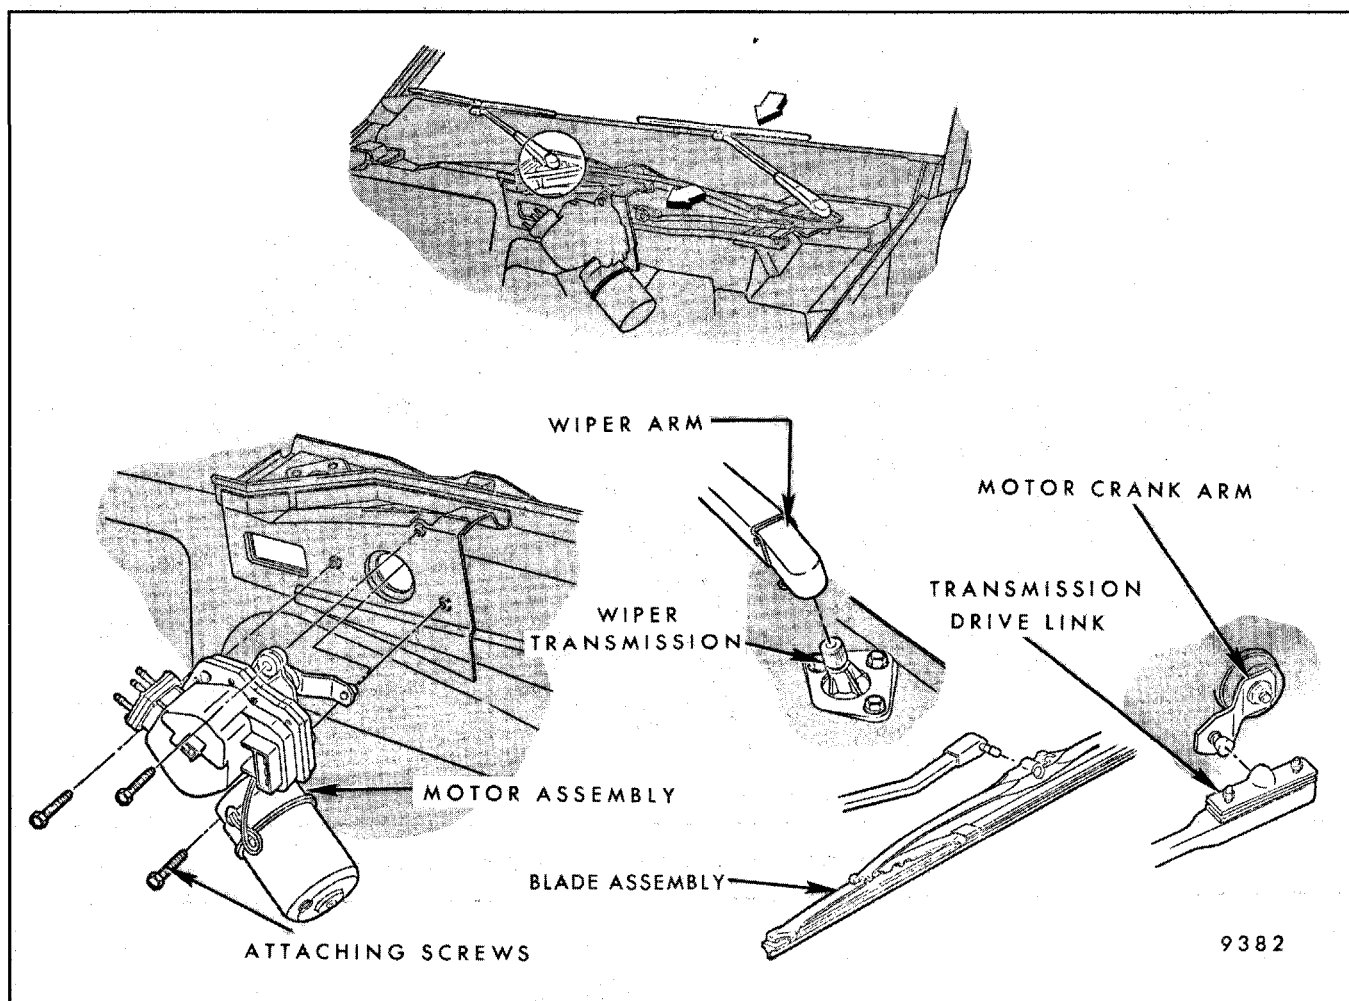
Round Motor Installation "B, C, D" Styles
